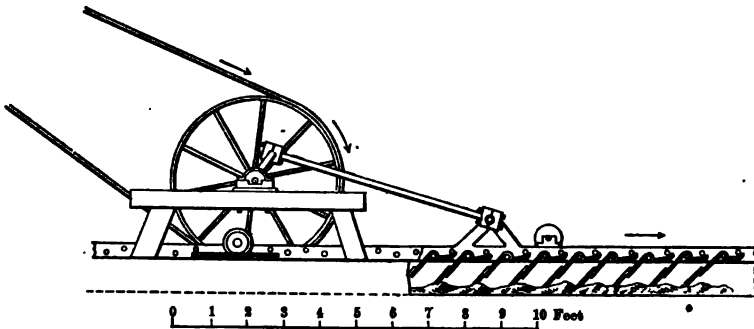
PUSH CONVEYOR, BACKWARD STROKE.
